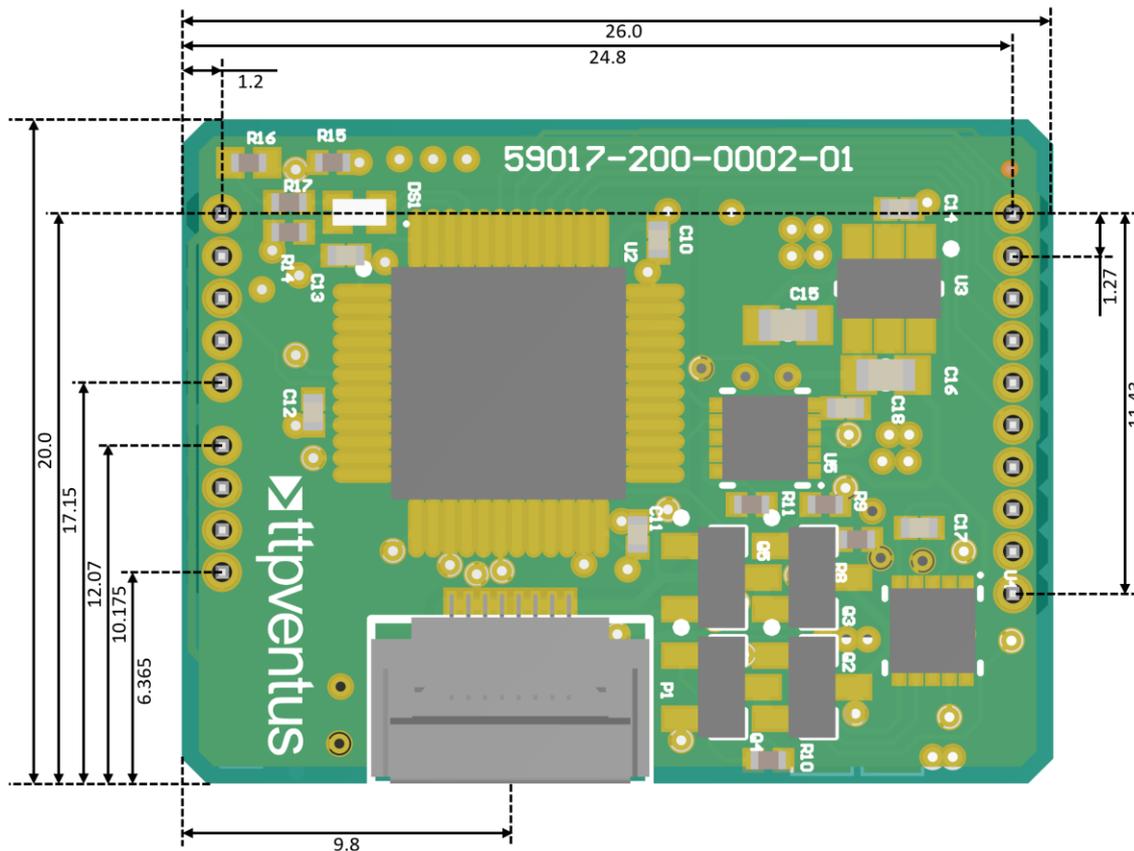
Disc Pump Drive PCB dimensions (millimetres)
